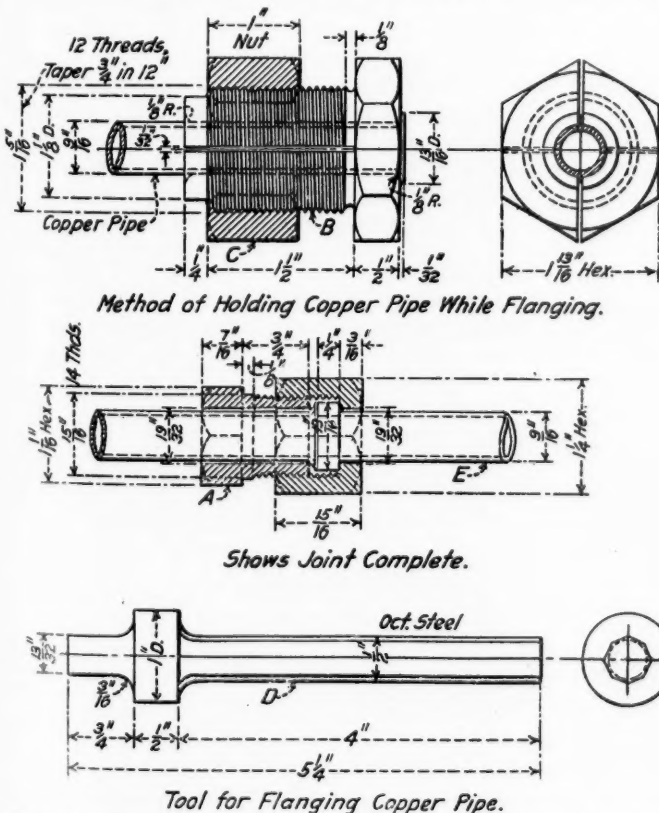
Connection and Tools for Repairing Broken Oil Pipes in Engine House Without Brazing. Moriarty.
